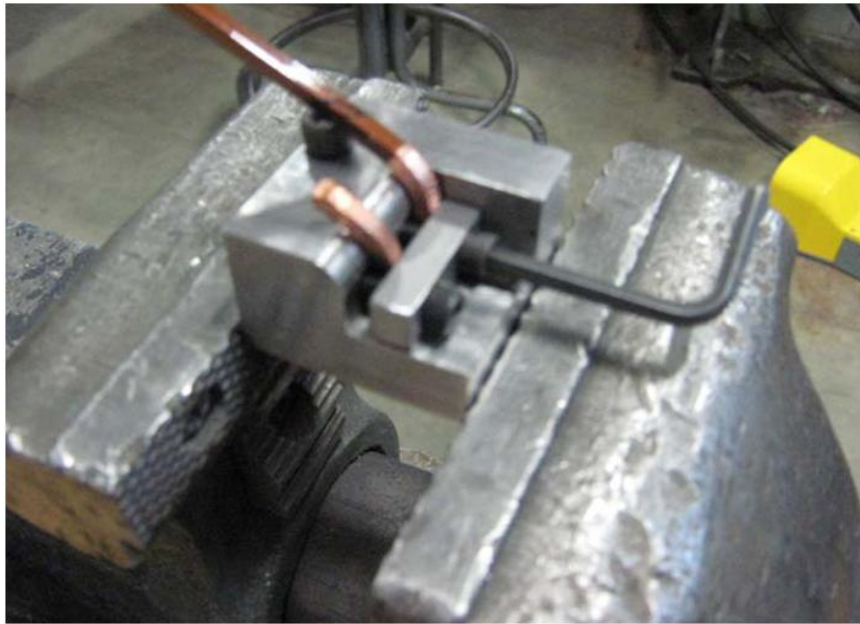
Bend Fixture used to Bend the Wires for the Parallel-Wire Geometry to Nominally a 115-Degree Angle
